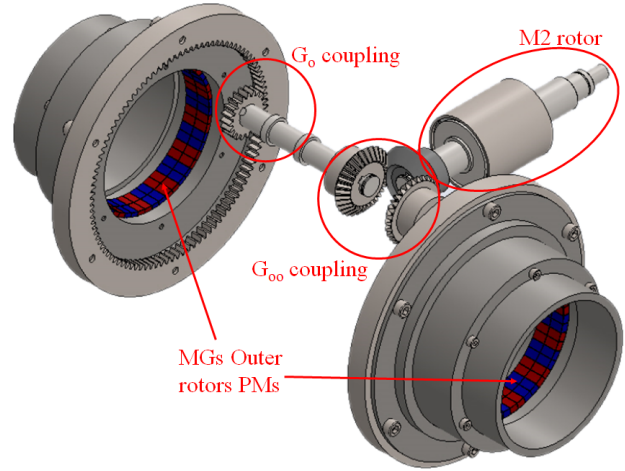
Outer interconnected rotors assembly. The inertia seen from the gears side is different from the one seen by the control motor M2 side because of the coupling  $G_o$ .
